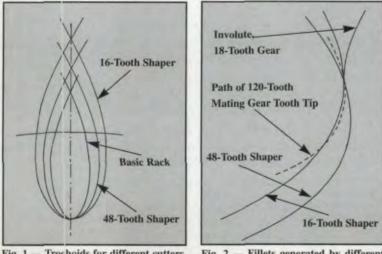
Trochoids for different cutters generating an 18-tooth gear.
